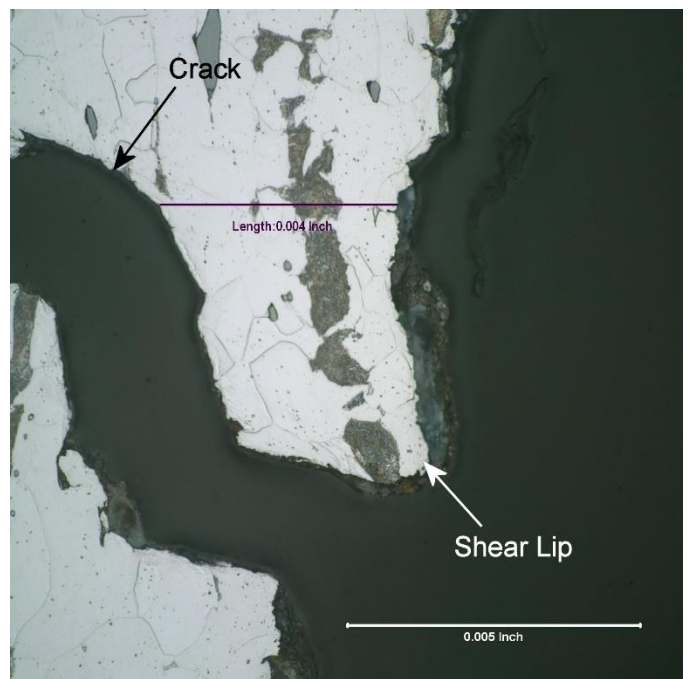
400X Fracture Origin 2 for Locking Clamp 1
